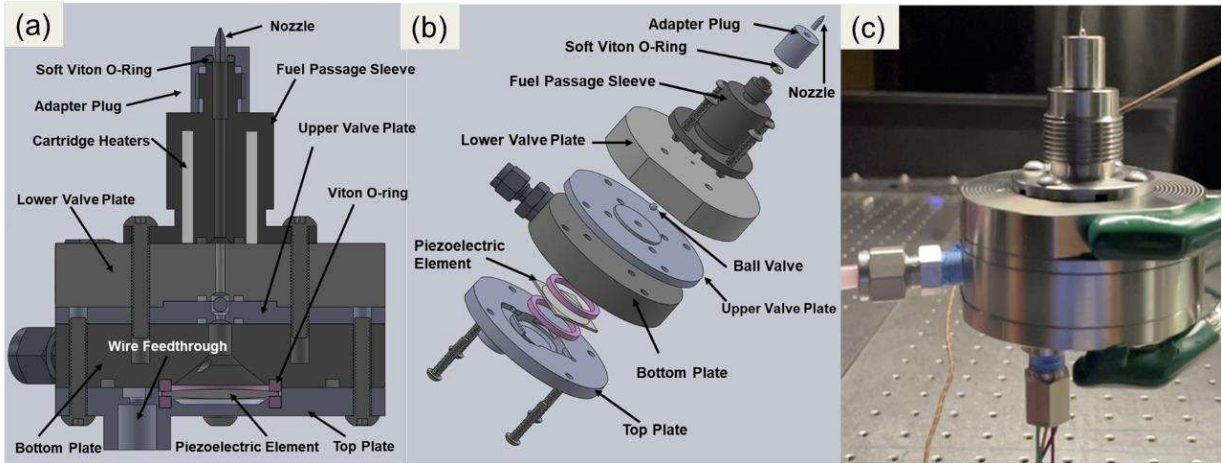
(a) Solid model of the piezoelectric droplet generator, (b) exploded view of a solid model of the droplet generator, and (c) a photograph of the fabricated droplet generator
